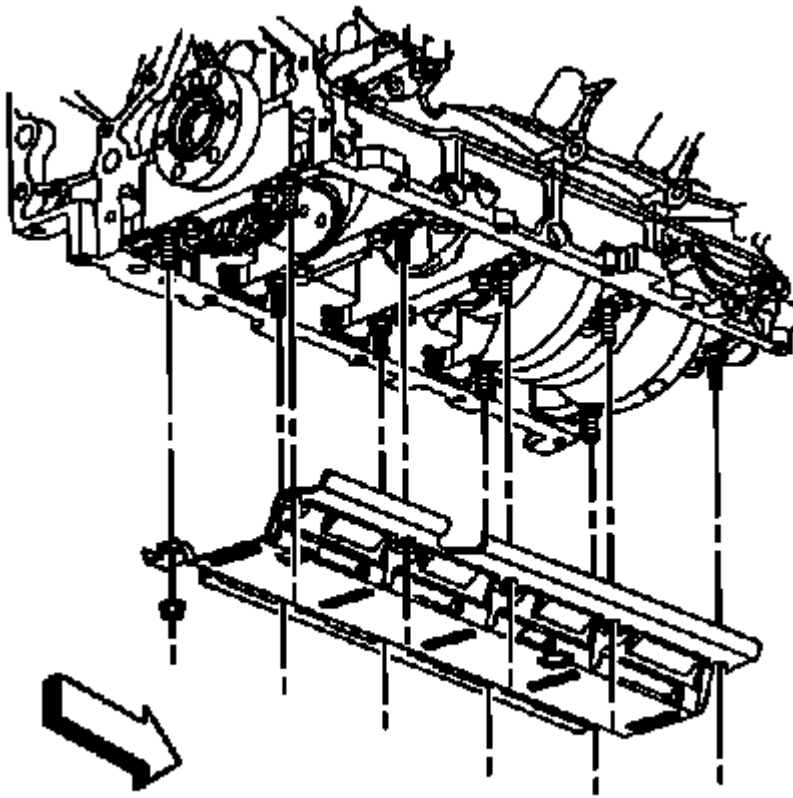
View Of Crankshaft Oil Deflector & Nuts
